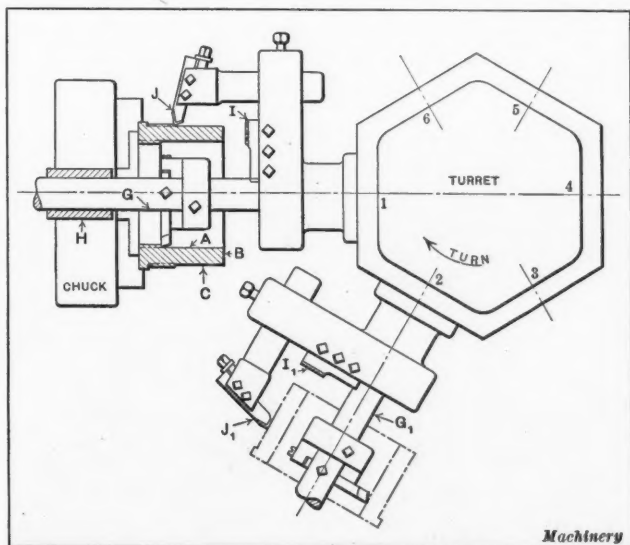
Lay-out of Tools used in performing First Operation on Bushing
